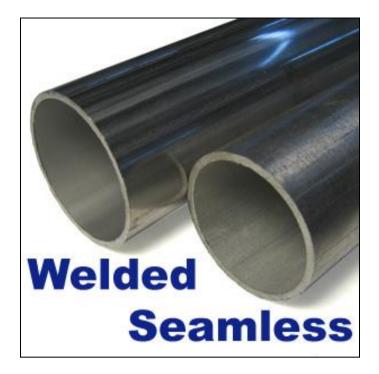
Classification of tube production methods can be tricky as show by this picture of welded and seamless stainless steel tubes. The welding heat affected zone (HAZ) is visible as a longitudinal discolouration at 12 o'clock on left hand side tube.
